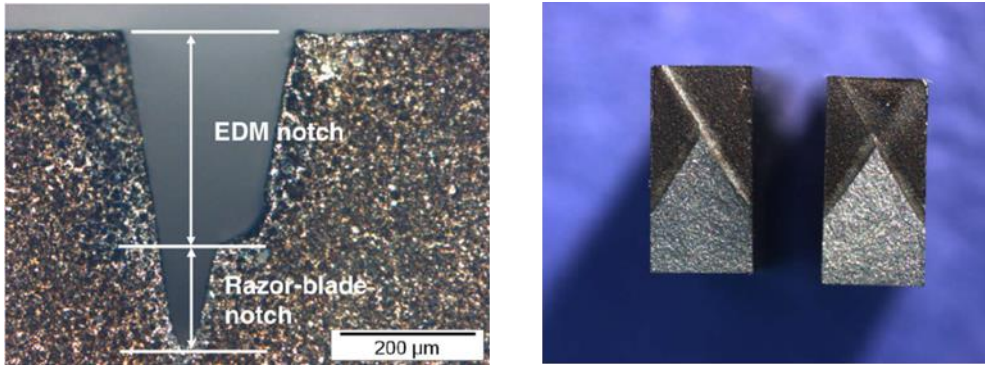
Photographs depicting the SEVNB notch geometry (left) and the CNB notch cross-sectional geometry after fracture (right).
